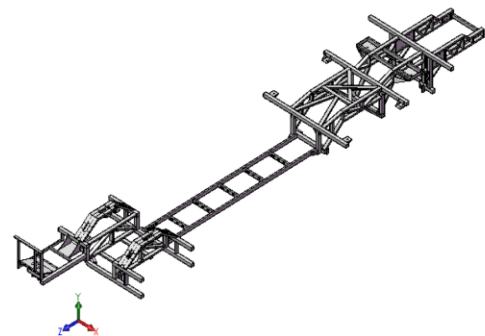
Chassis platform of 8-wheel Double Decker bus configuration; DD model
